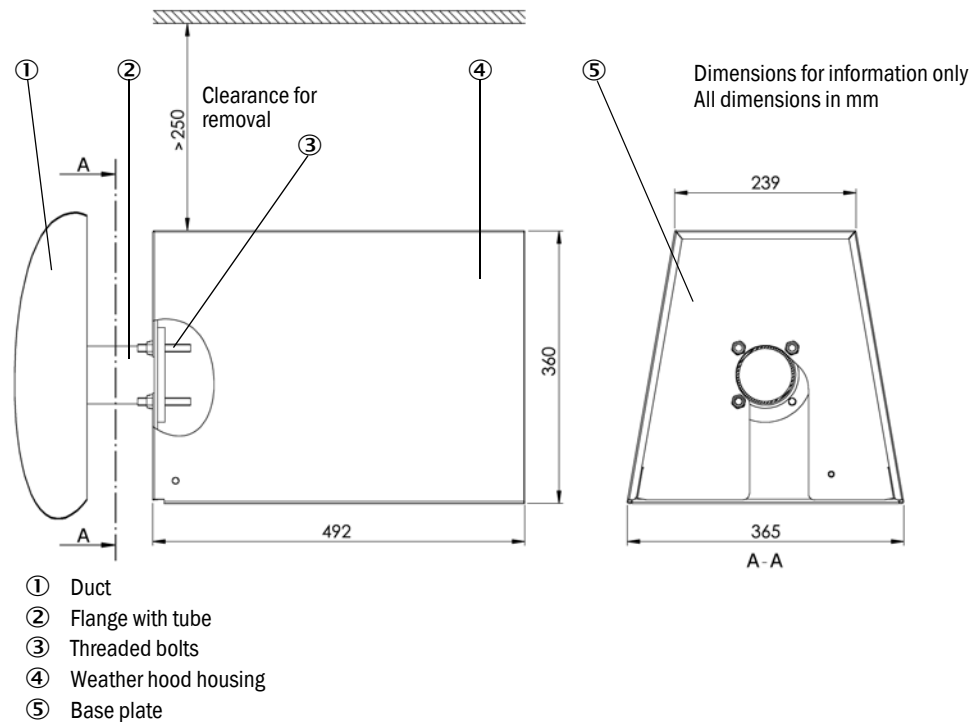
Fitting the weather hood housing for the sender/receiver unit
